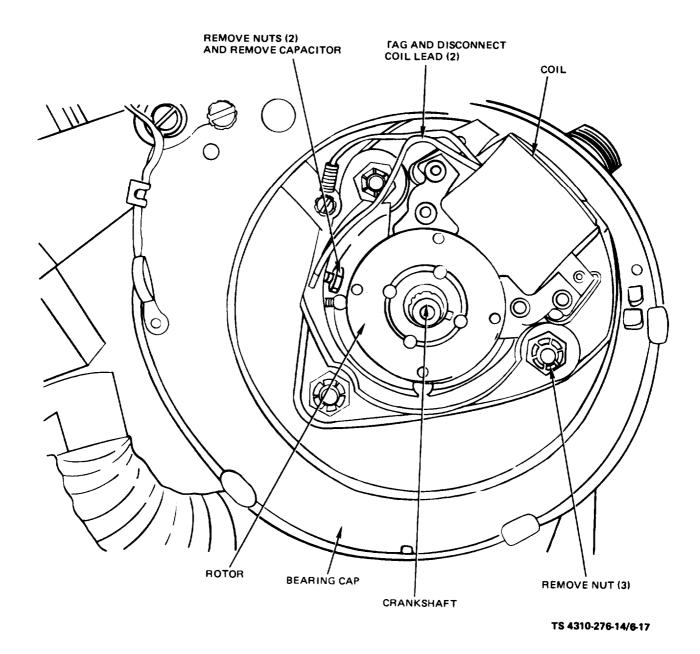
Coil and Rotating Magnet, Removal and Installation (Model 1A08-3)
